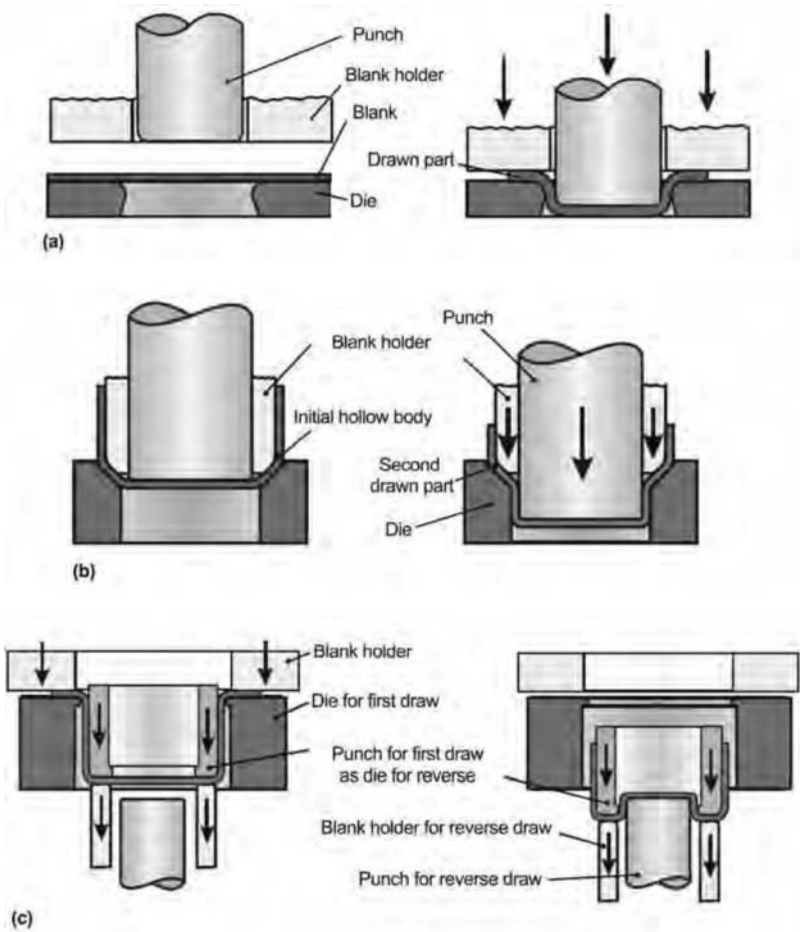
Drawing operations: (a) single deep drawing with blank holder; (b) redrawing; (c) reverse drawing. Source: Ref 2.4
